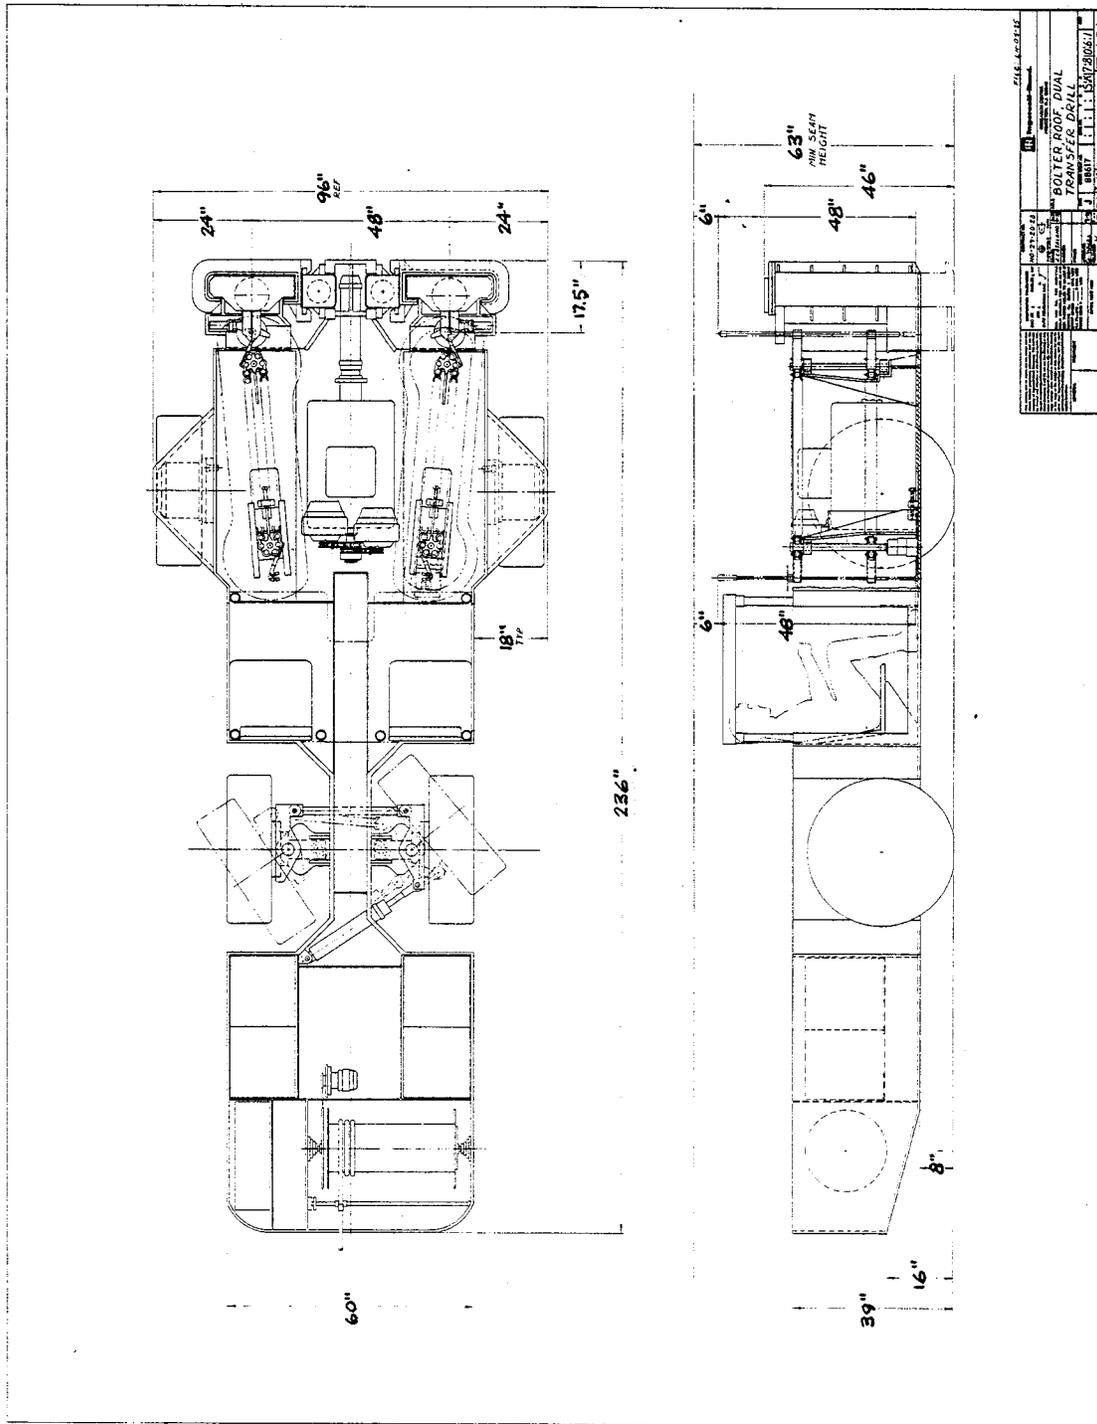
Plan and Elevation Views of the Transfer Bolter - Dual Boom (New Chassis)
